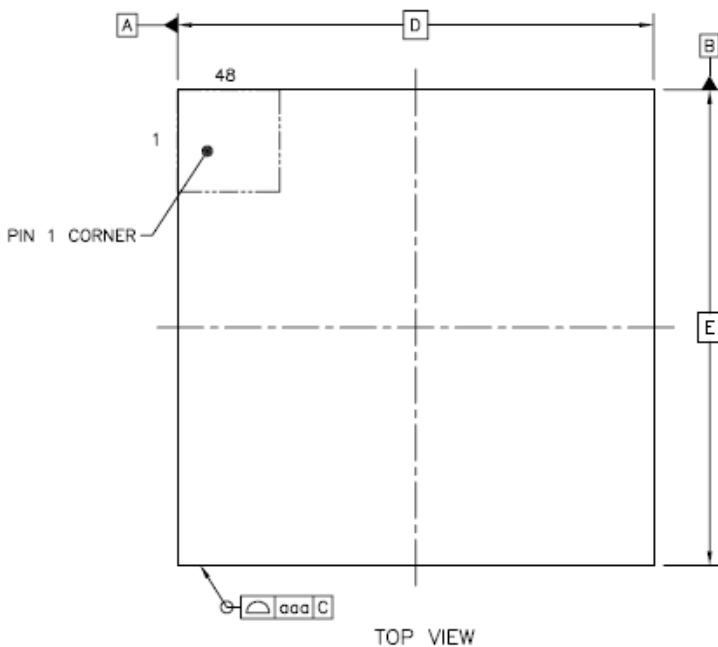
QFN (7mm x 7mm) 48-pin Package Dimensions
